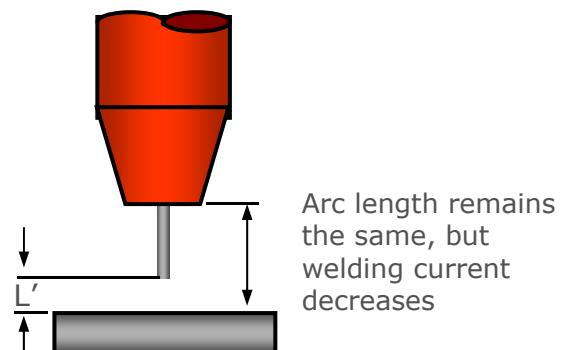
Contact tip to workpiece distance; electrode extension and nozzle to workpiece distance.
